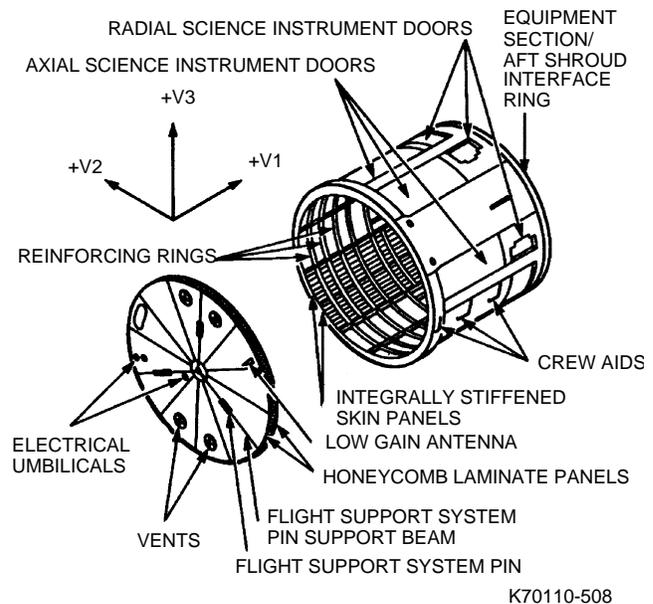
Support Systems Module aft shroud and bulkhead
